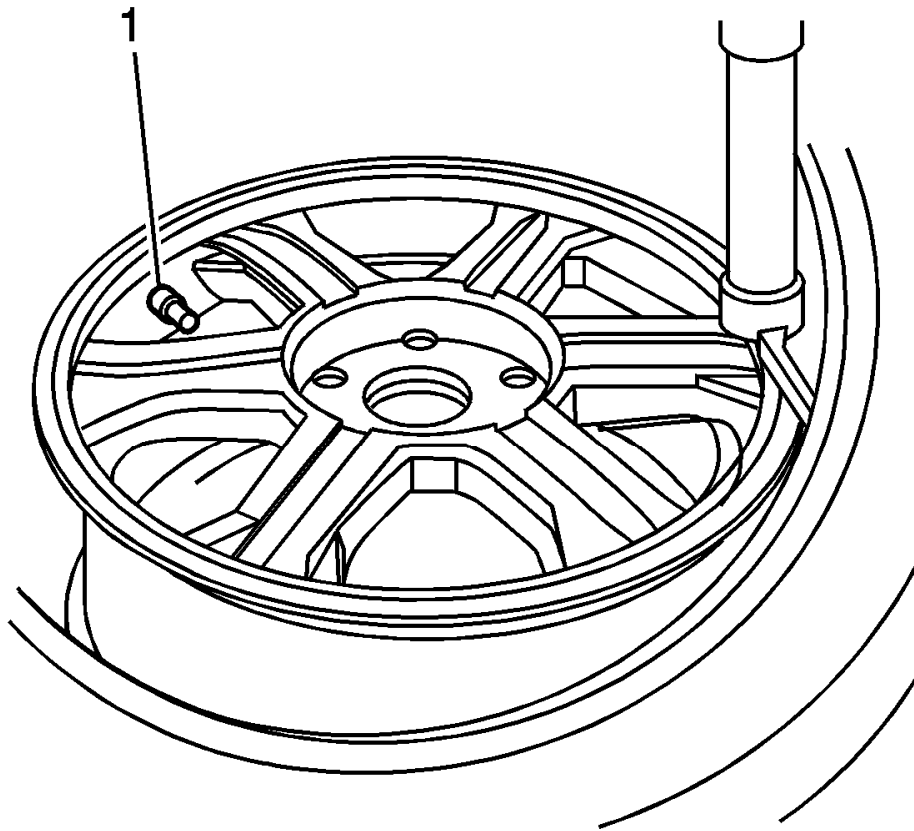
Reposition Wheel And Tire So Valve Stem Is At 7 O'clock Position Relative To Head
